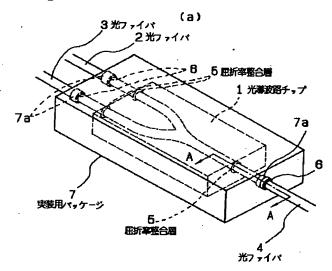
Drawing showing the 3rd example of the optical waveguide circuit module of this invention
